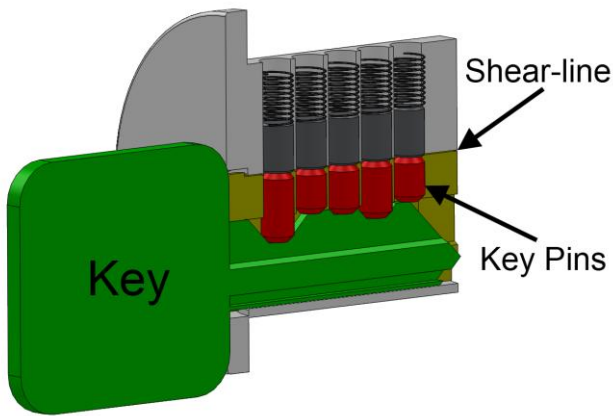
Key-pins align with the shear-line when the proper key is inserted.
